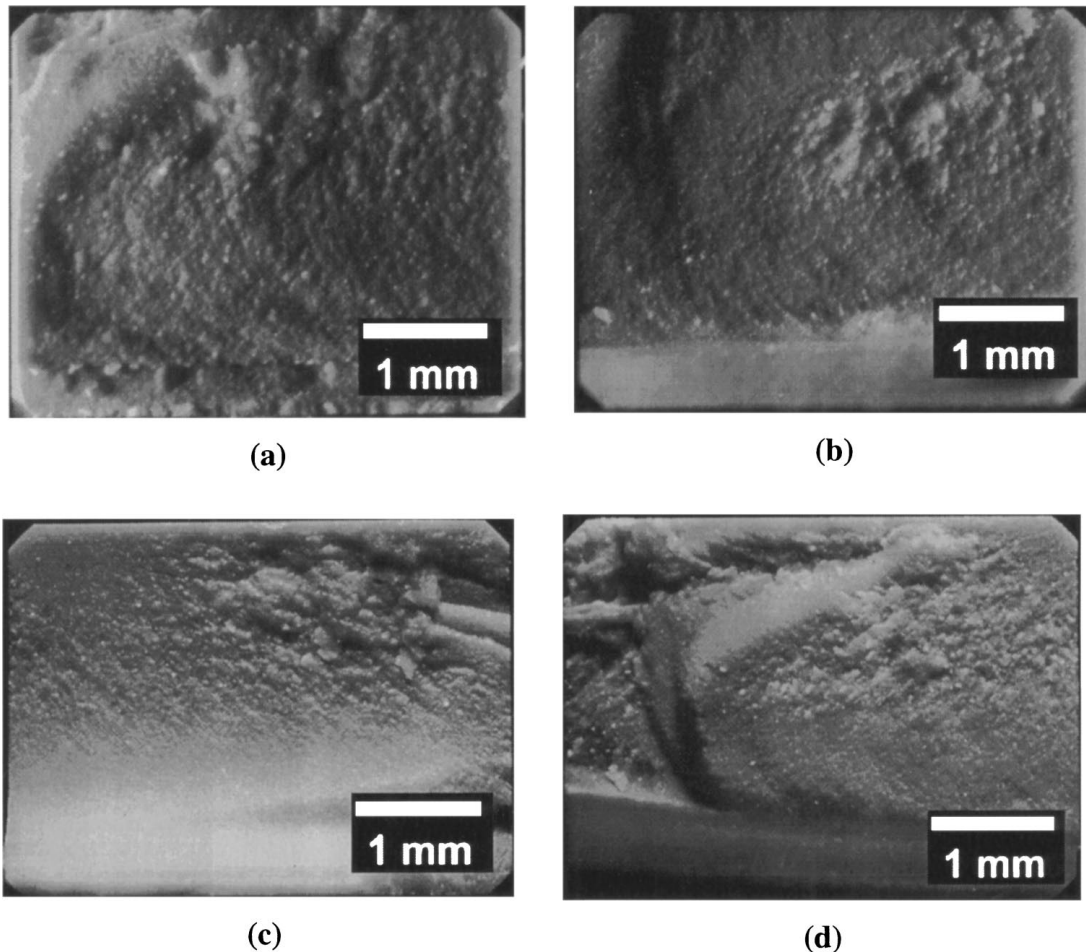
Optical fractography of stress ruptured NT 164 specimens: (a) 1150°C in air, (b) 1150°C in wet air, (c) 1288°C in wet air, and (d) 1288°C in air (preoxidized specimen fractured during loading).
